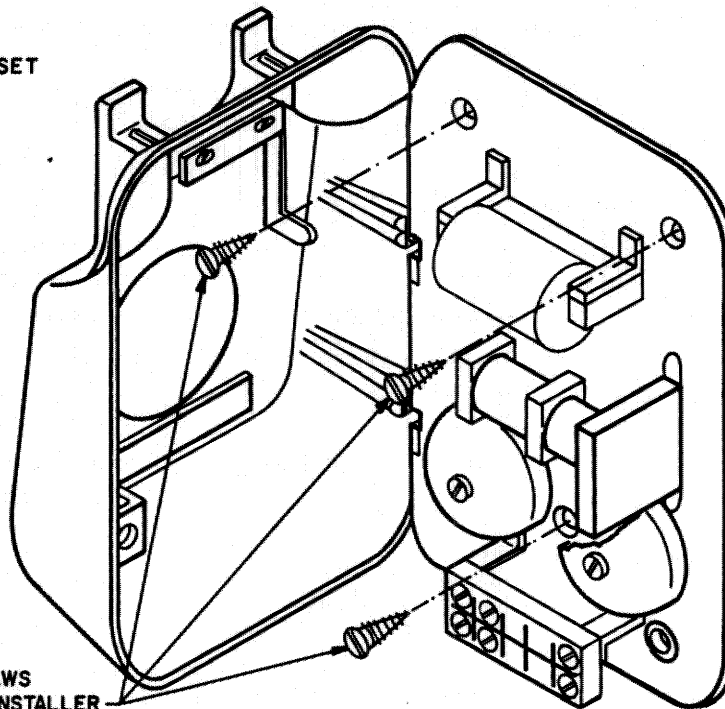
TYPICAL METHOD OF MOUNTING THE WALL TELEPHONE
